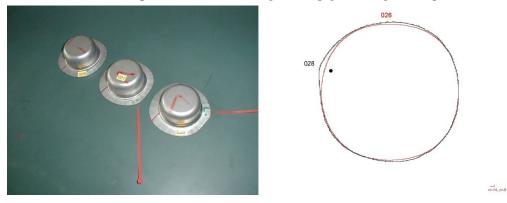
Laser assisted deep drawing: plan of cup drawing
